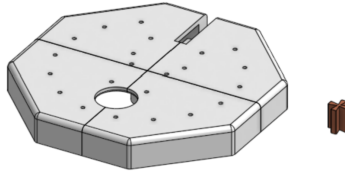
The four base quadrants and dovetail key, prior to assembly.
